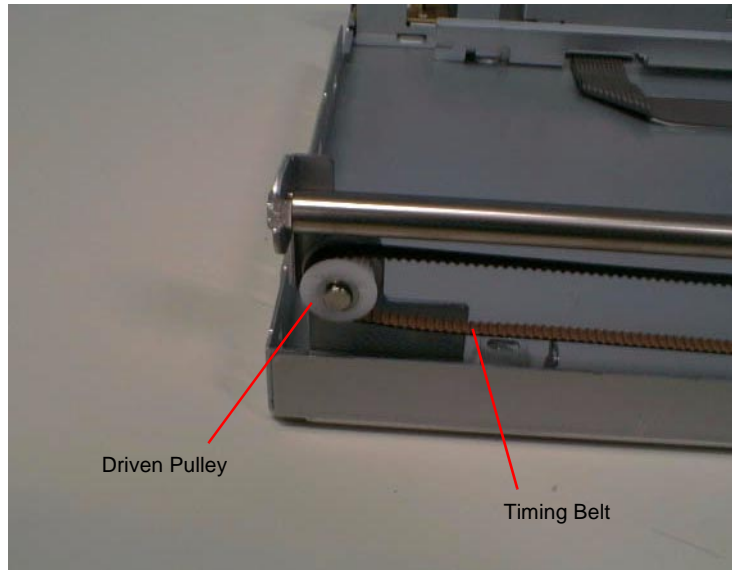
Driven Pulley Assembly Removal (1)
